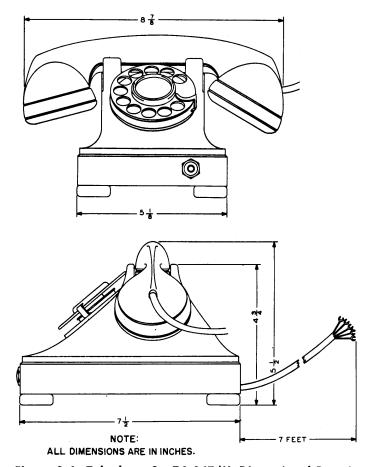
Telephone Set TA-267/U, Dimensional Drawing
